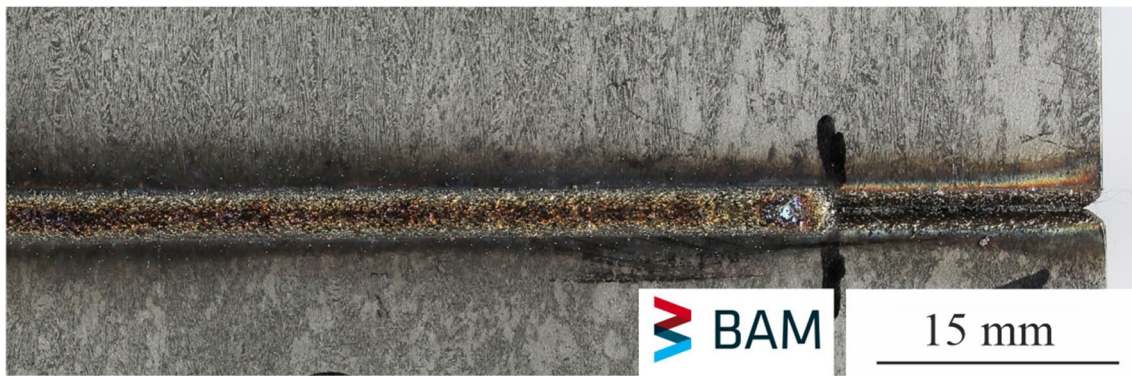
Top view of plates with DED tacking before laser beam welding
